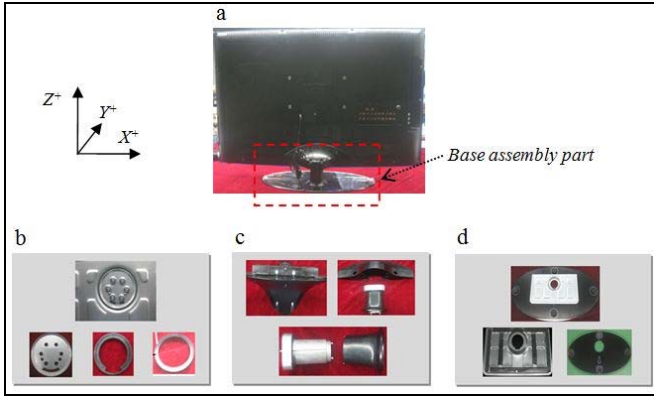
The base assembly part of LCD television (a) base assembly part, (b) Components A,B,C (c) Components D,E,F (d) Components G,H,I.
